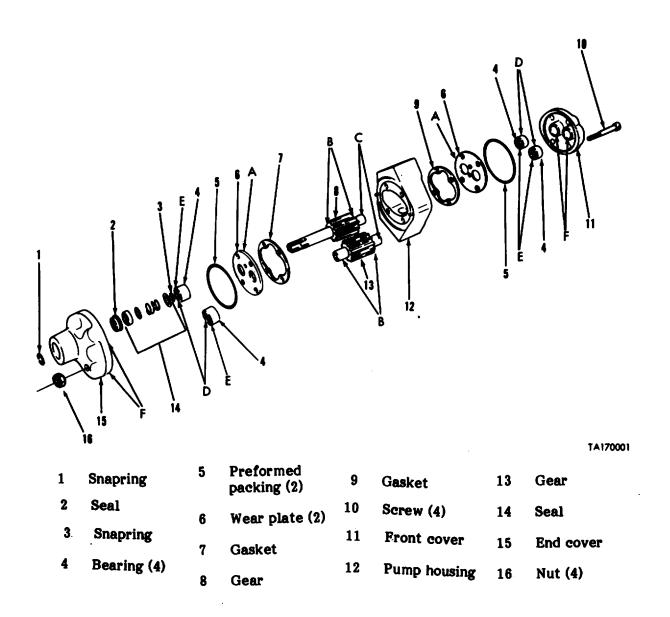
Disassembly or assembly of hydraulic pump assembly.
